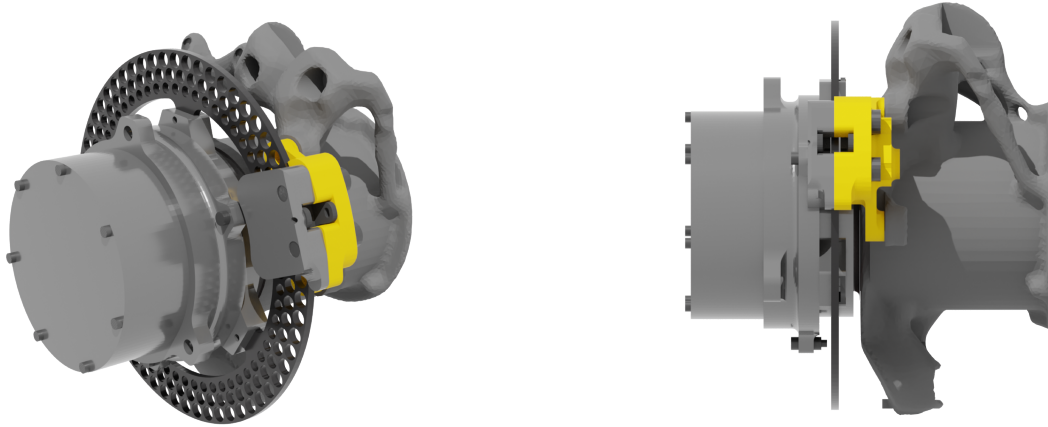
Isometric view (left) and side view (right) of the final rear wheel assembly
